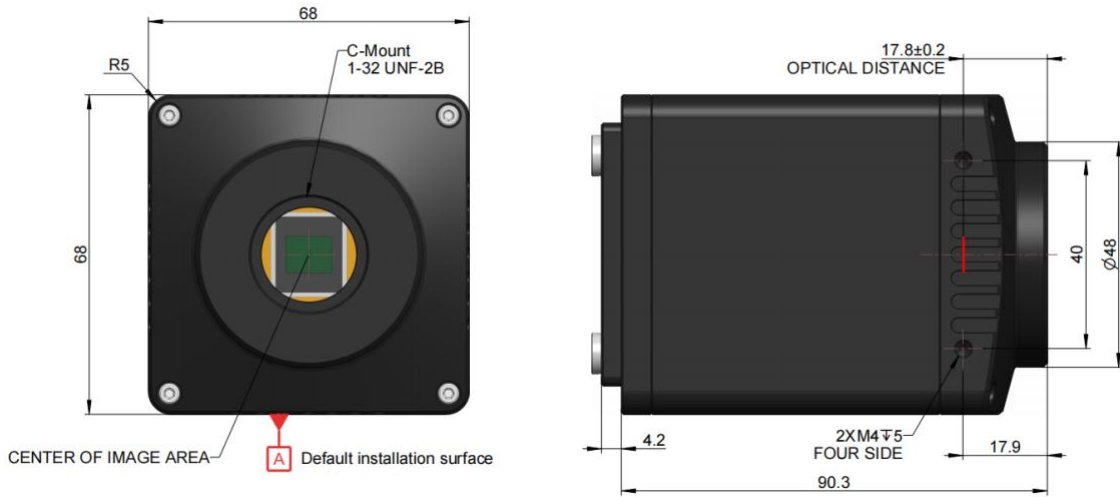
The Front and side view dimensions of the SWIR331 series camera
